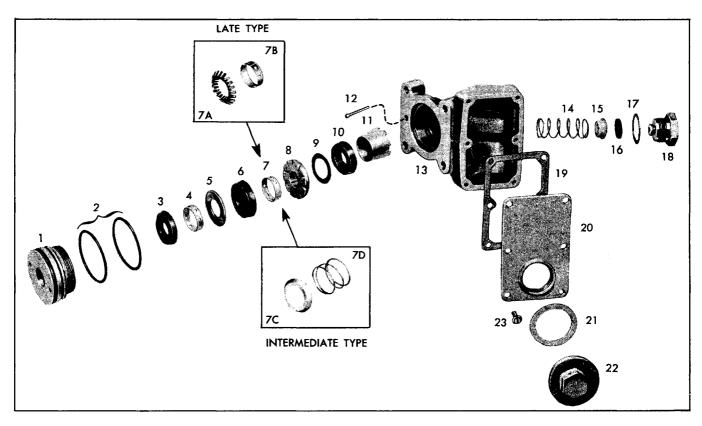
Cylinder Plug Assembly-Exploded View
